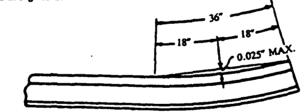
Side Elevation of Rail Uniform Upsweep Tolerance at Rail Ends per Section 13.3
